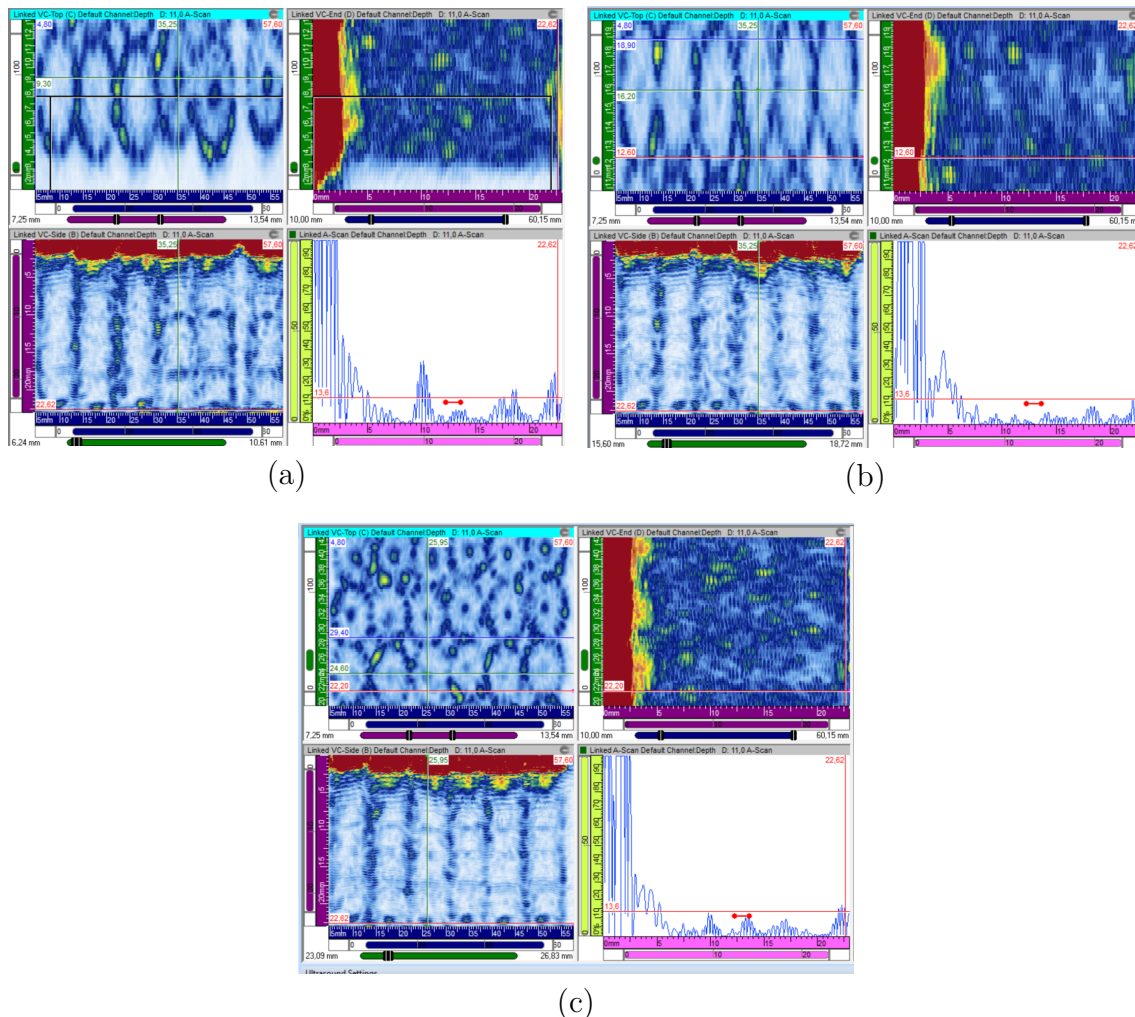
PAUT results of cylindrical samples: (a) Left 3 cylinders: 0.5mm spherical defects; Right 3 cylinders: 2mm penny defects (b) Left 3 cylinders: 1mm spherical defects; Right 3 cylinders: 0.5mm penny defects (0° tilt, 35° roof angle) (c) Left 3 cylinders: 1.5mm internal defects; Right 3 cylinders: 1mm penny defects (0° tilt, 35° roof angle)
